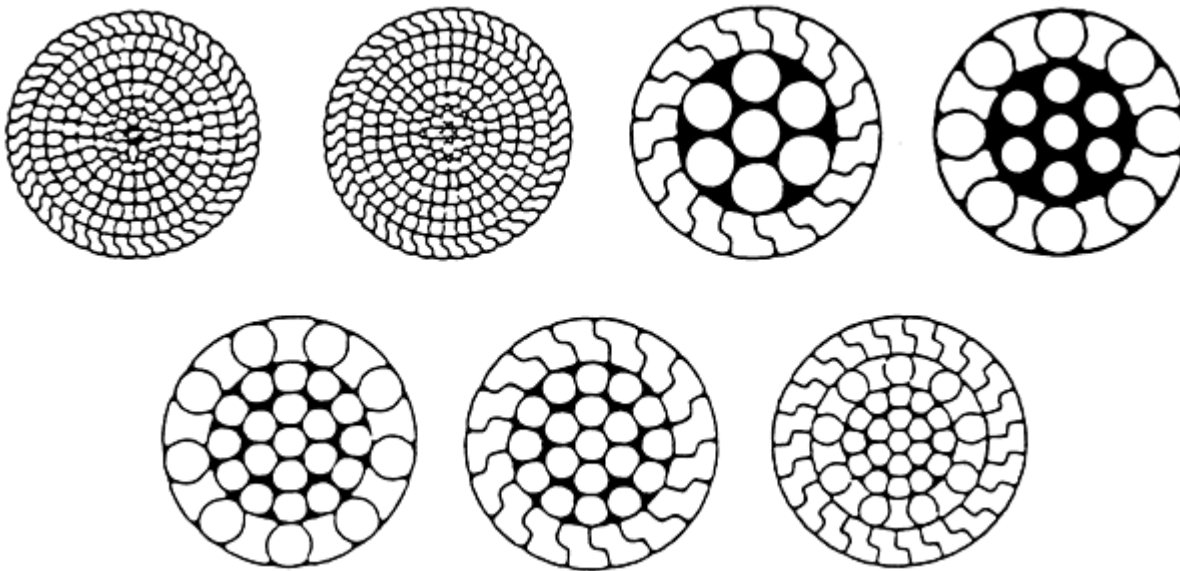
Cross-sections of typical locked-coil track strand wire rope construction
